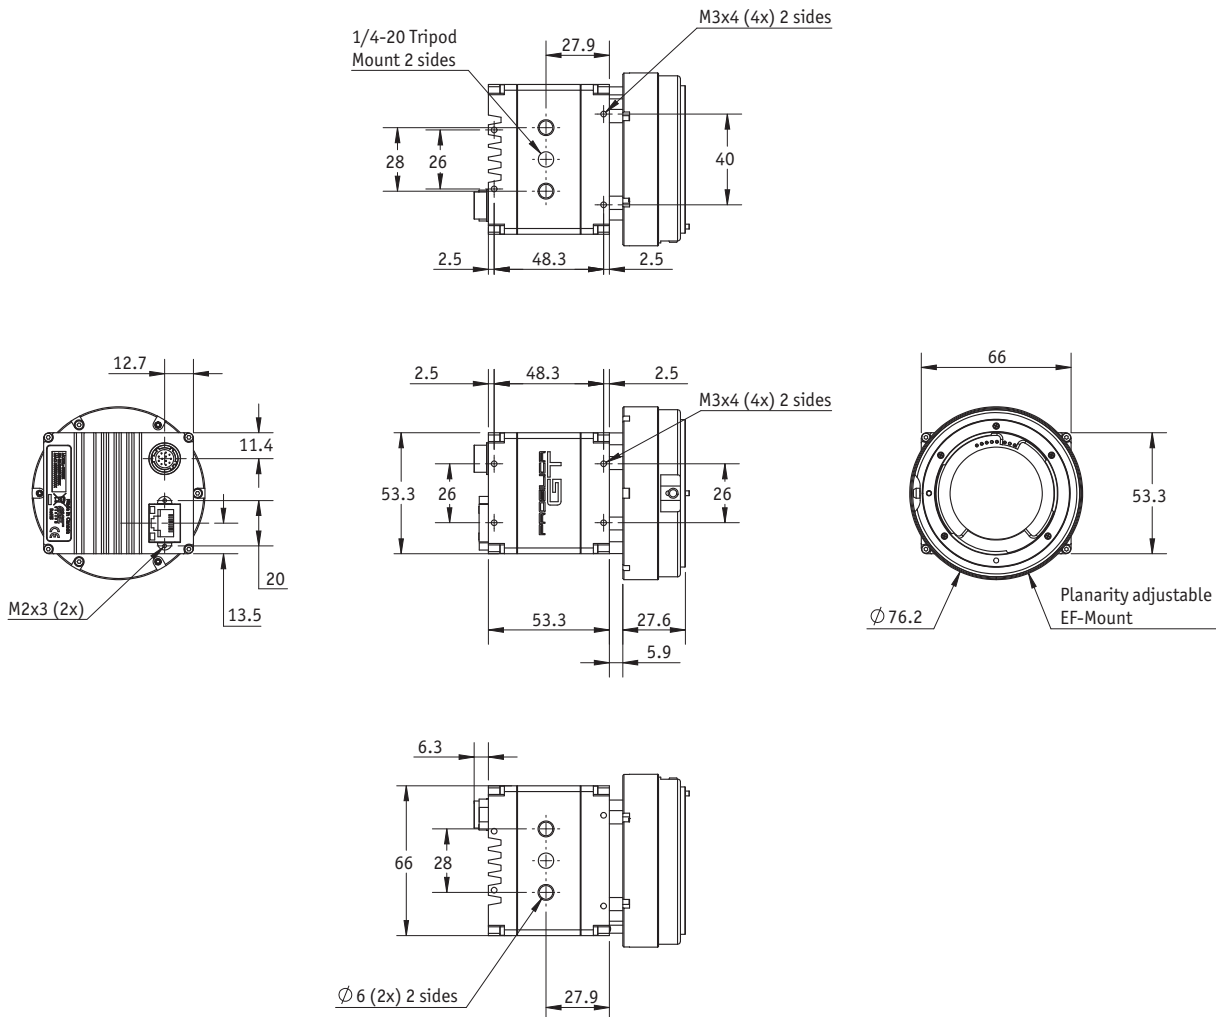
Mechanical dimensions of Prosilica GT1930L with planarity adjustable EF-Mount
